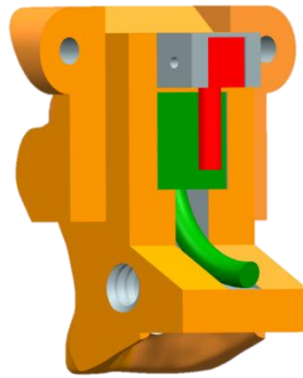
Posterior aspect of the face component showing linear accelerometer (red component) and angular rate sensor (green component) mounting locations.
